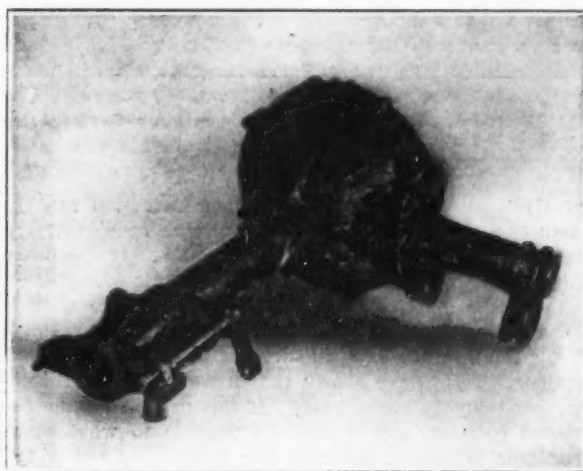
A Repaired Automobile Gear Case that had been Broken into Three Pieces.
